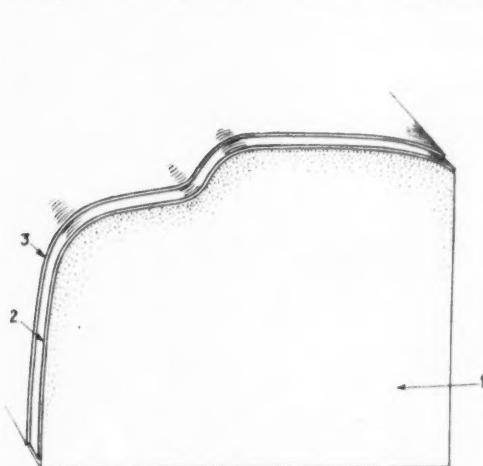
Section through a male-type mould showing a method of embodying wood or metal inserts
